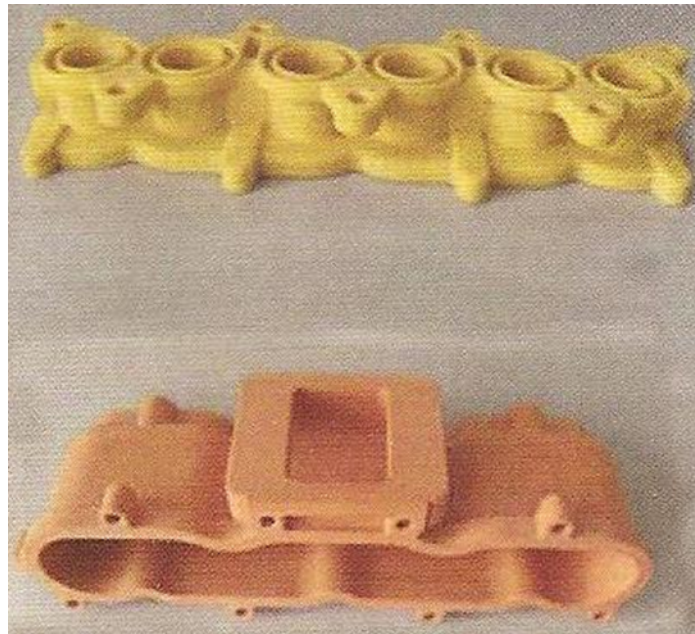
Examples of machine parts produced by Envisiontec Perfactory Family
